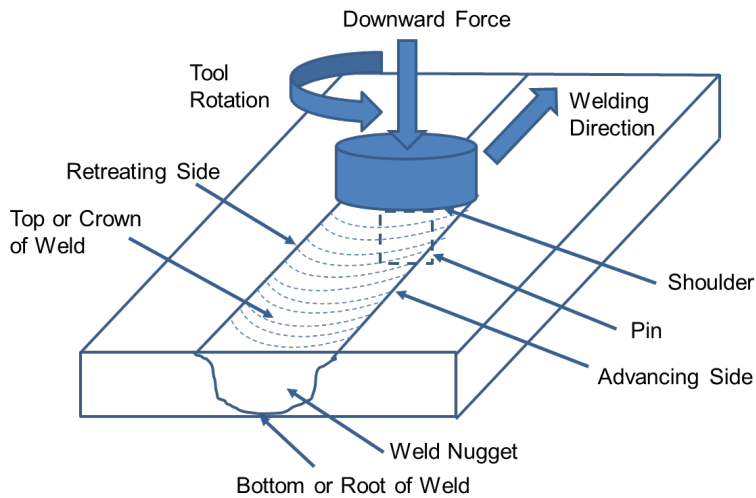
Friction Stir Welding Process [35]
